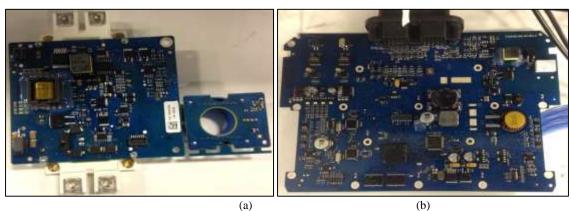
(a) Brake chopper gate-driver board, Si IGBT module, and LEM current sensor, and (b) control board
